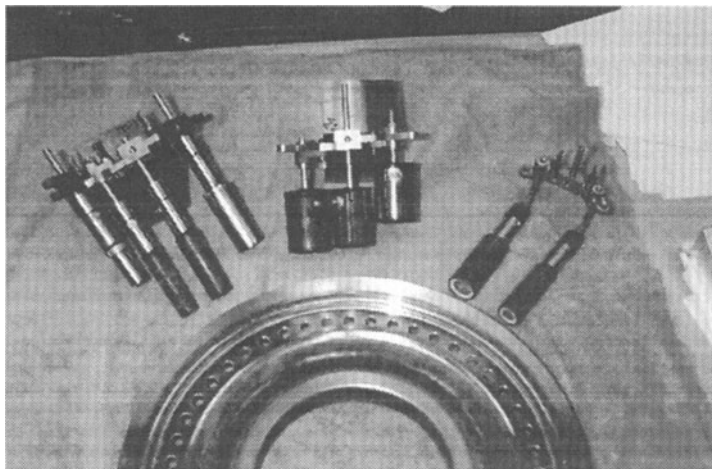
Complex transducer fixtures are used to inspect a curved engine part.
